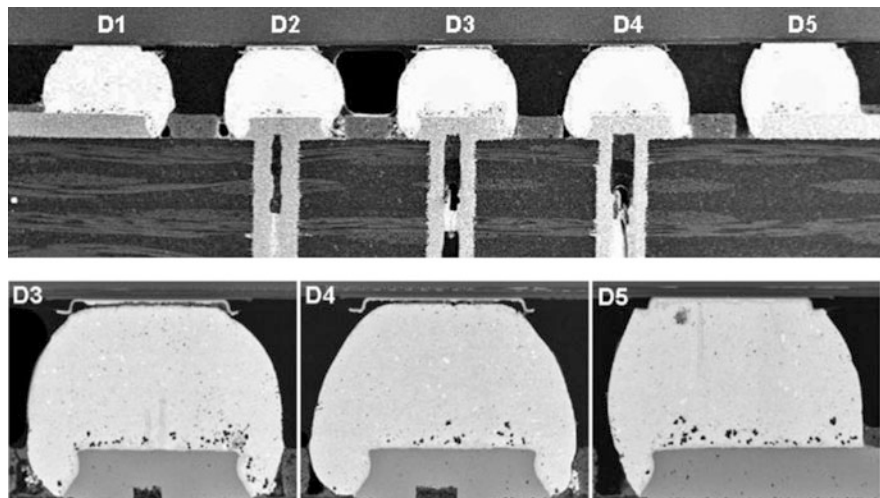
Inner solder joint fails on a component that failed ACLV test
